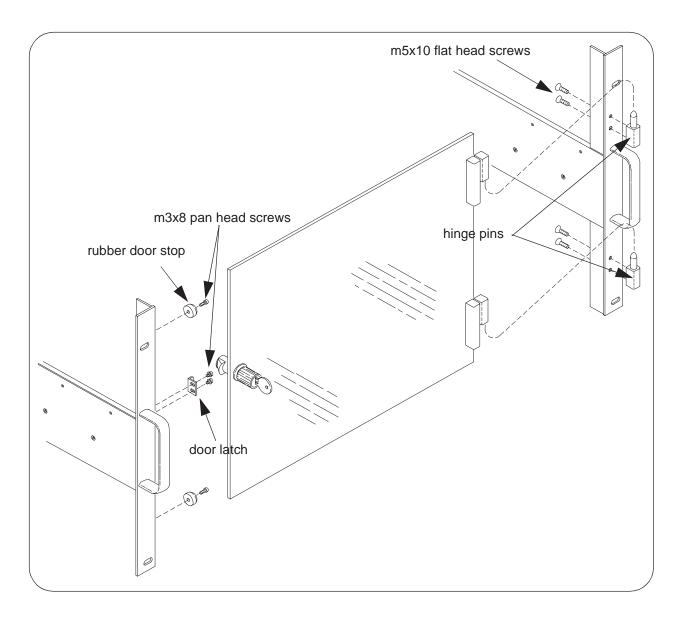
Installing the Acrylic Door Hinges, Door Stops, and Latch Keeper.
